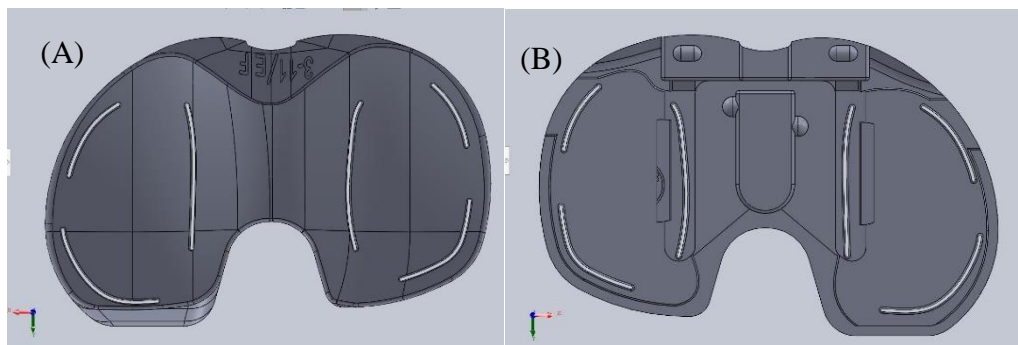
Zimmer Specific Design a) Top View b) Bottom View
